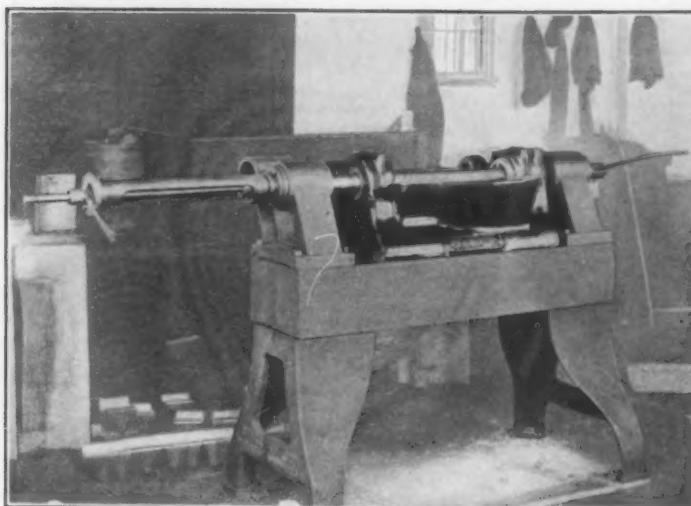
The Lathe Beds Mounted on the Planing Machine for Machining the Ways and Showing the Angle Gage with Which the Tools Are Set for the V's and the Distance Gage to Which the Ways Are Machined
